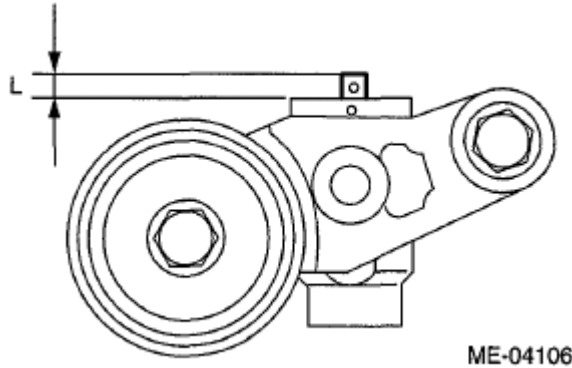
Identifying Adjuster Rod Protrusion Dimension
